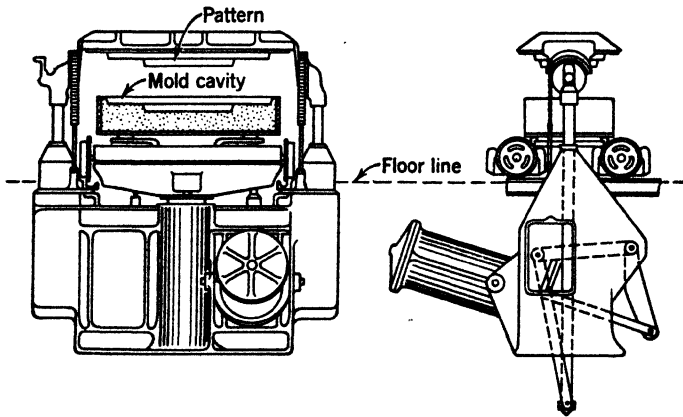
C. Pattern has been drawn. The next step is to remove mold and return roll-over table to proper position for another mold. (Reproduced from print belonging to Osborn Manufacturing Co., Cleveland, Ohio.)
